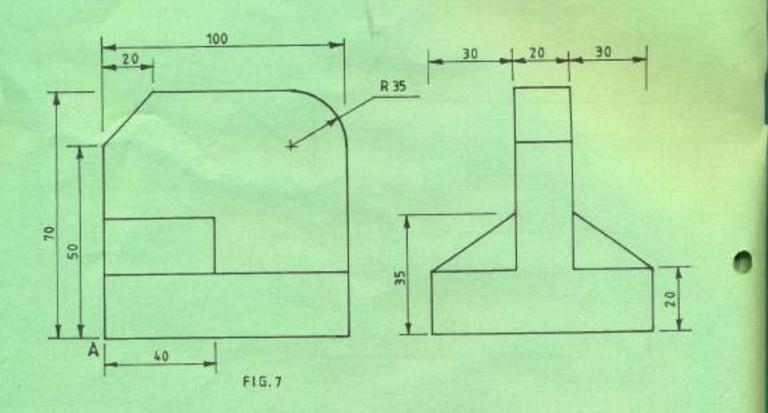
shows two views of a block. Make full size isometric drawing of the block taking corner "A" as the lowest point. (20 marks)
